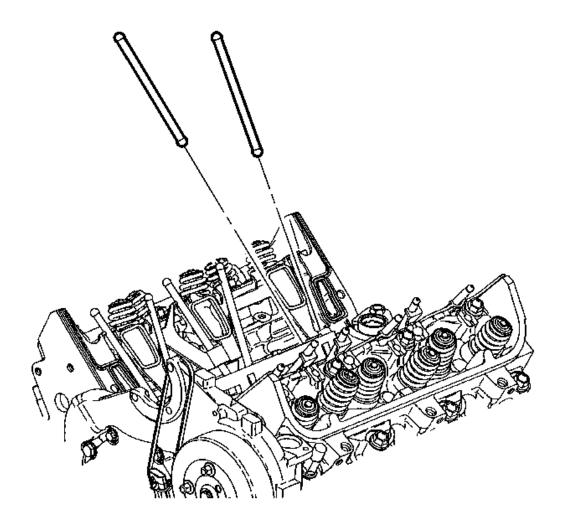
Installing Push Rods Courtesy of GENERAL MOTORS CORP.
